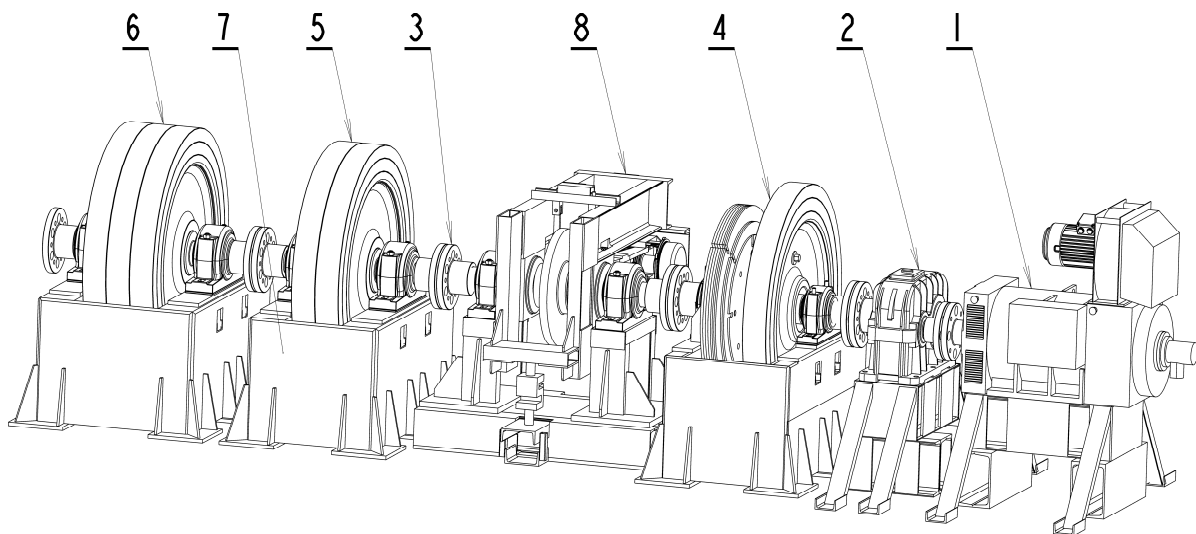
The scheme of UIC flywheel test brake bench of KDMT
